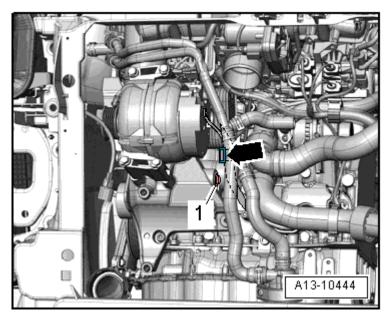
Identifying Ribbed Belt Tensioner Bolt And Locating Electrical Wiring Harness
